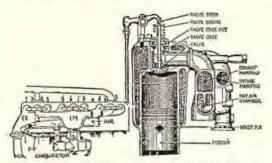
Buick's exhaust heating of mixture. Note the exhaust manifold which adjoins the inlet manifold (IM). The lower part of the exhaust manifold (hot-air chamber) is divided from the exhaust (above). Air passes through the lower chamber which is heated. Hot air is also drawn into jacket around the upper part of the carburetor by a flexible tube connection (FT).
